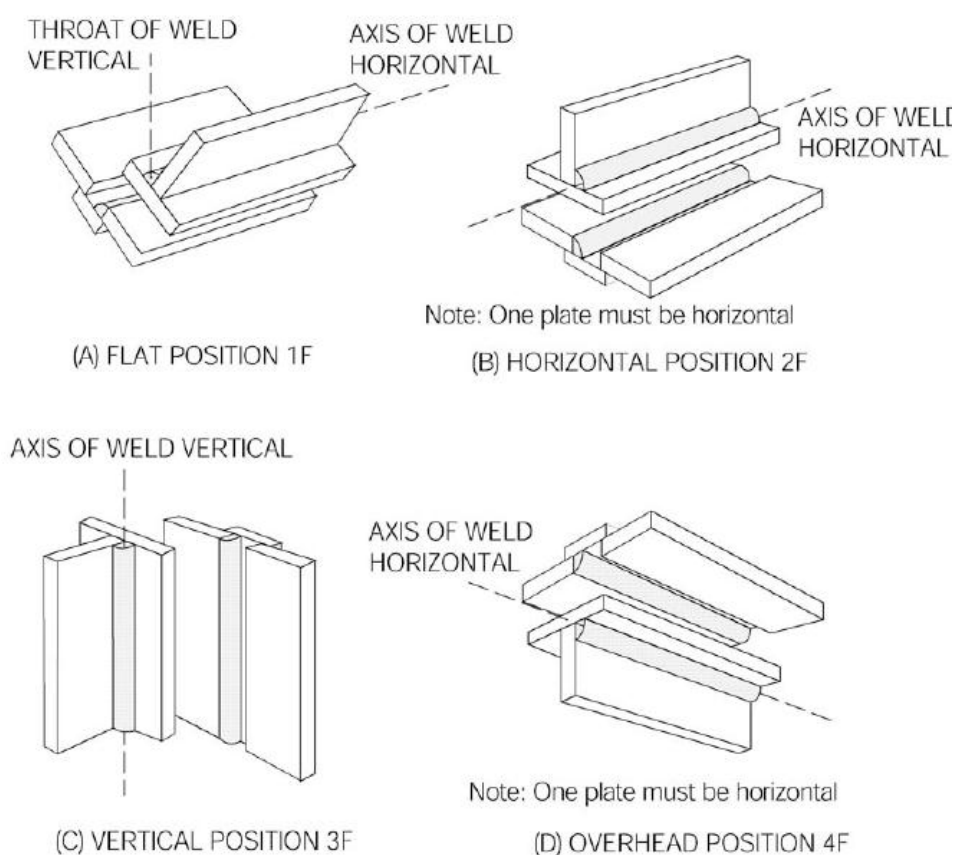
WELDING POSITIONS ACCORDING TO AWS-
